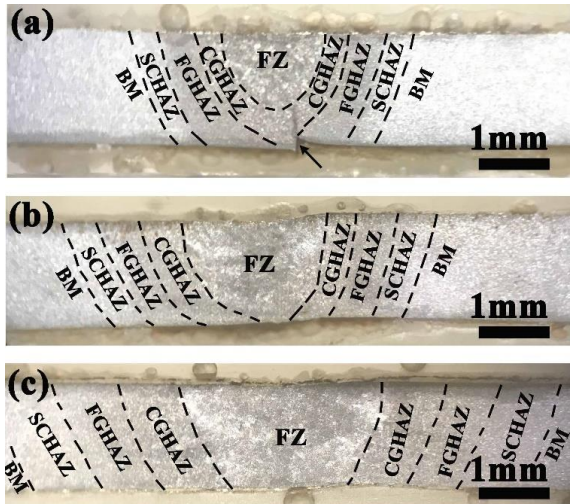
Macroscopic image of the welded samples: (a) LW400, (b) LW450, (c) LW500.
